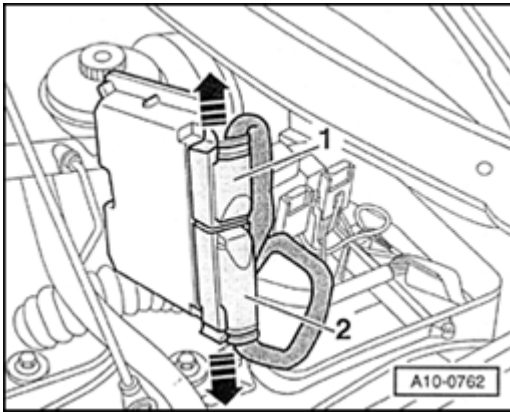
Removing Smaller Connector From Engine Control Module (ECM) By Removing Connector Lock
